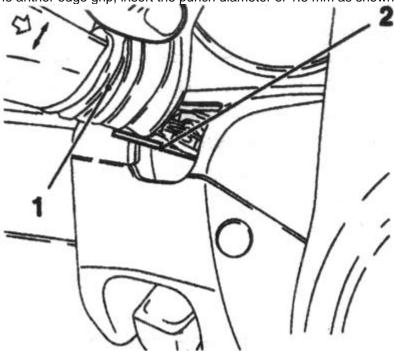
Setting knockout: 1 - anther 2 - hammered
